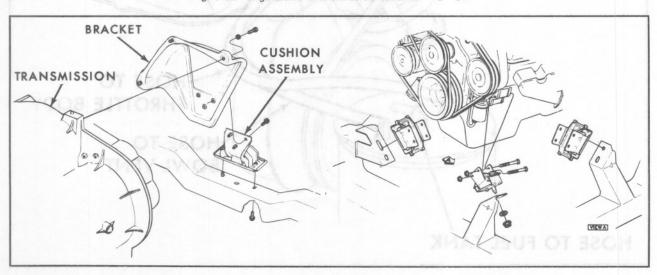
Engine and Transmission Mounts - Eldorado
